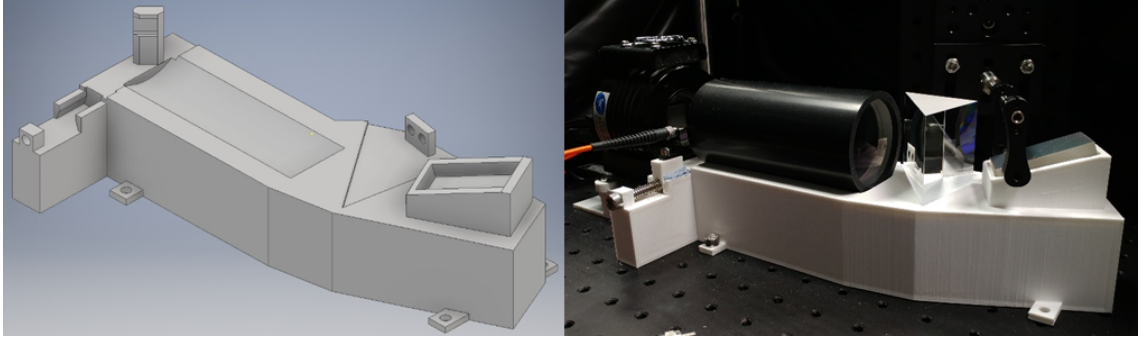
(Left panel) Image of CAD model mechanical mount design. (Right panel) Image of assembled 3D printed mount with spectrometer components fitted.
